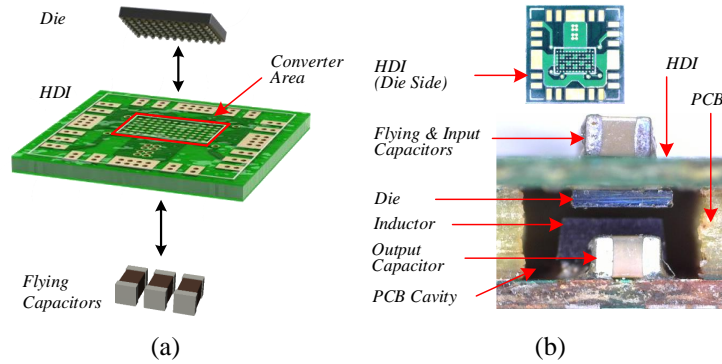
The co-packaging of FC die. (a) HDI breakout board and (b) cutaway view of the die assembly.
